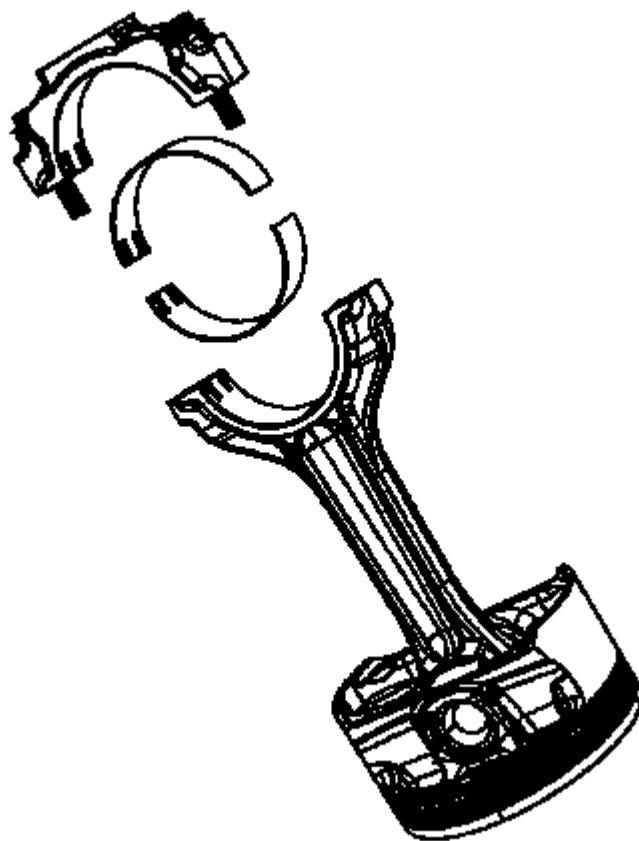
View Of Piston, Connecting Rod & Bearing Assembly
